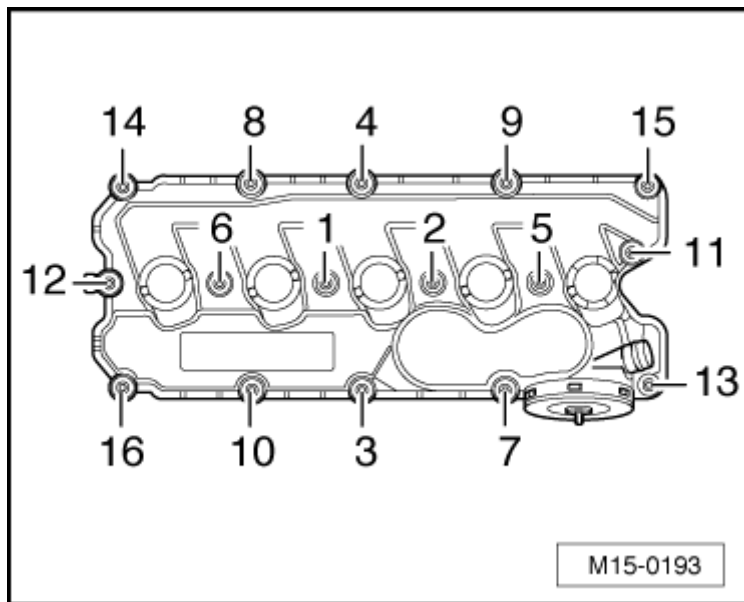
Identifying Cylinder Head Cover Bolt Removal Sequence
